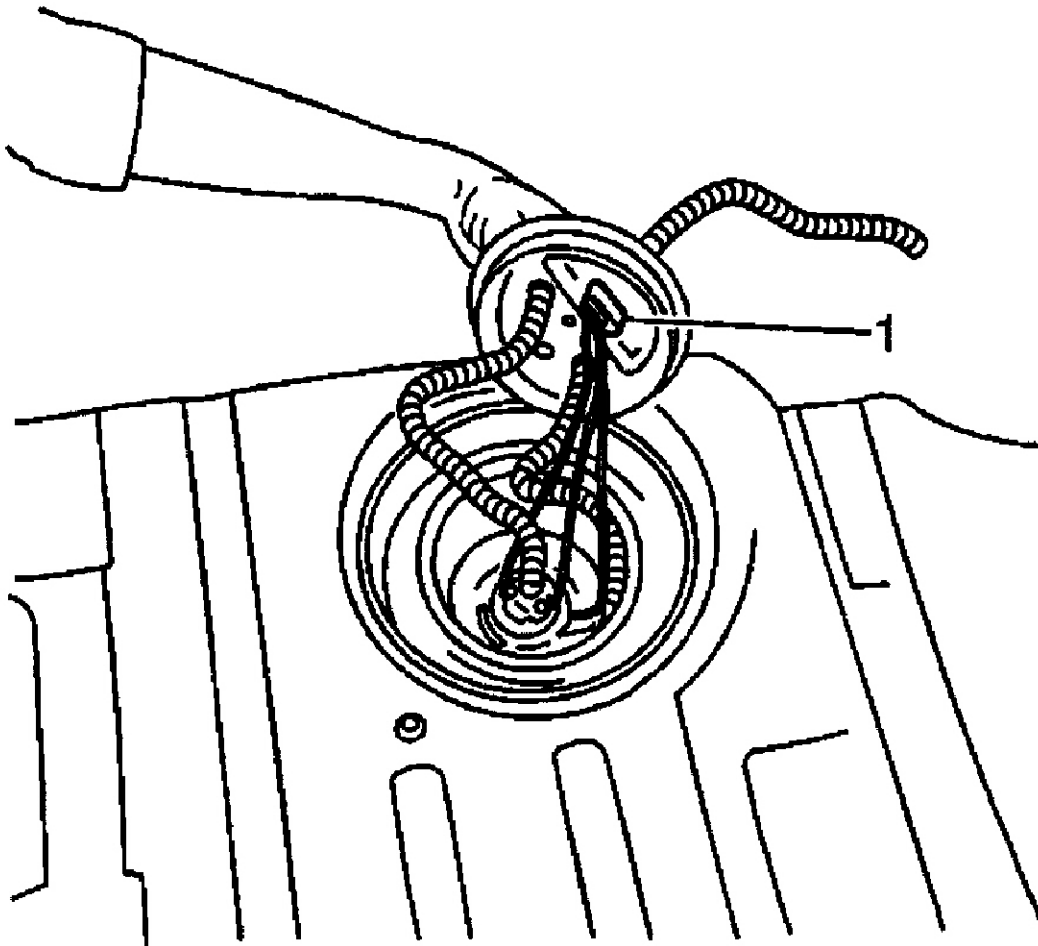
Removing/Installing Spring Loaded Clamp (Catera - 3.0L)
